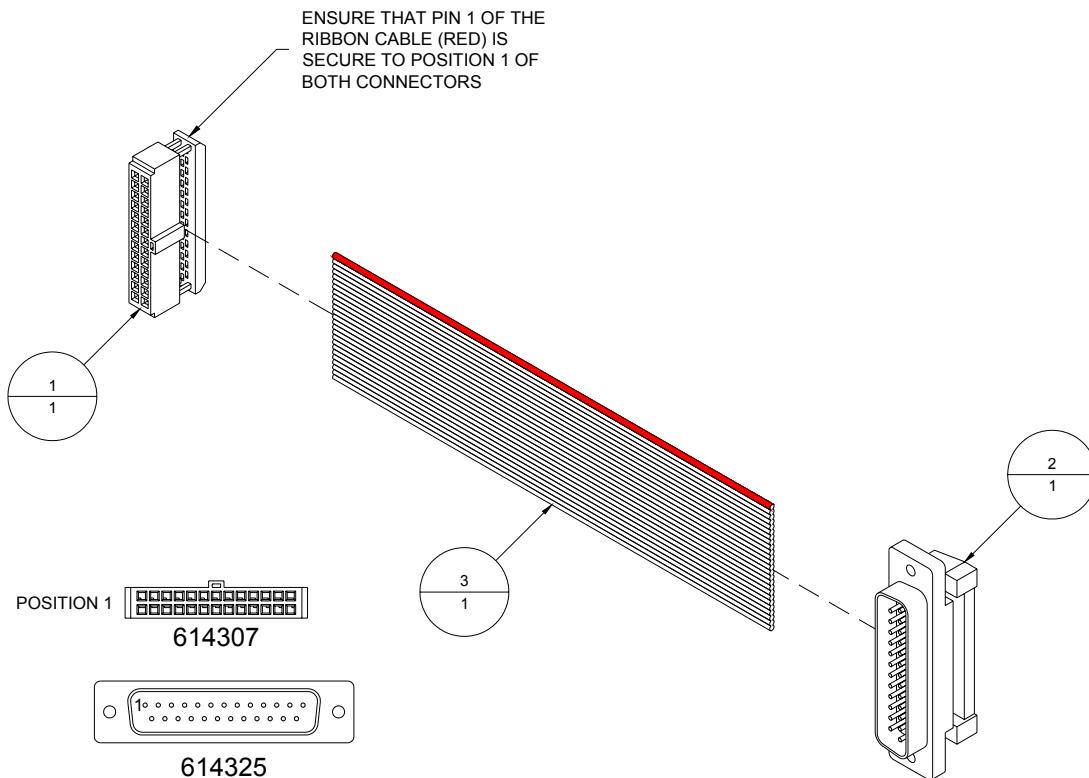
Cable, Controller I/O Receptacle Assembly (9102434A)
